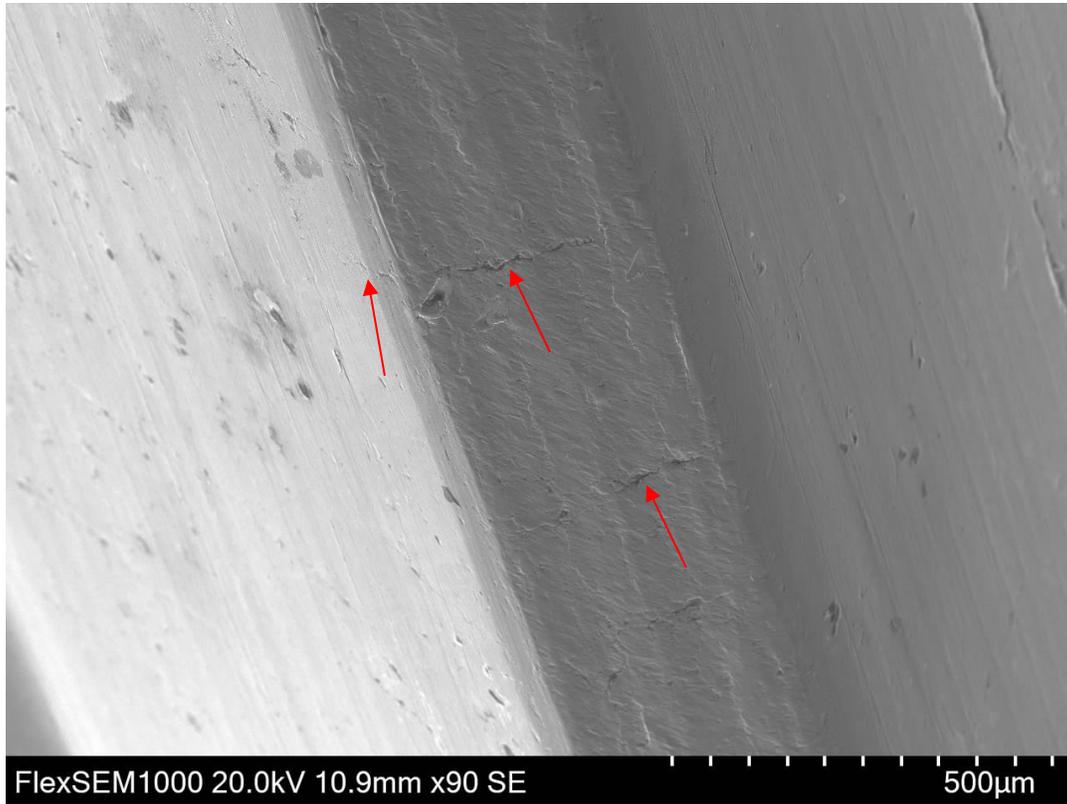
MICRO-CRACK LIKE INDICATIONS ON THE THREADS, BOLT C2
